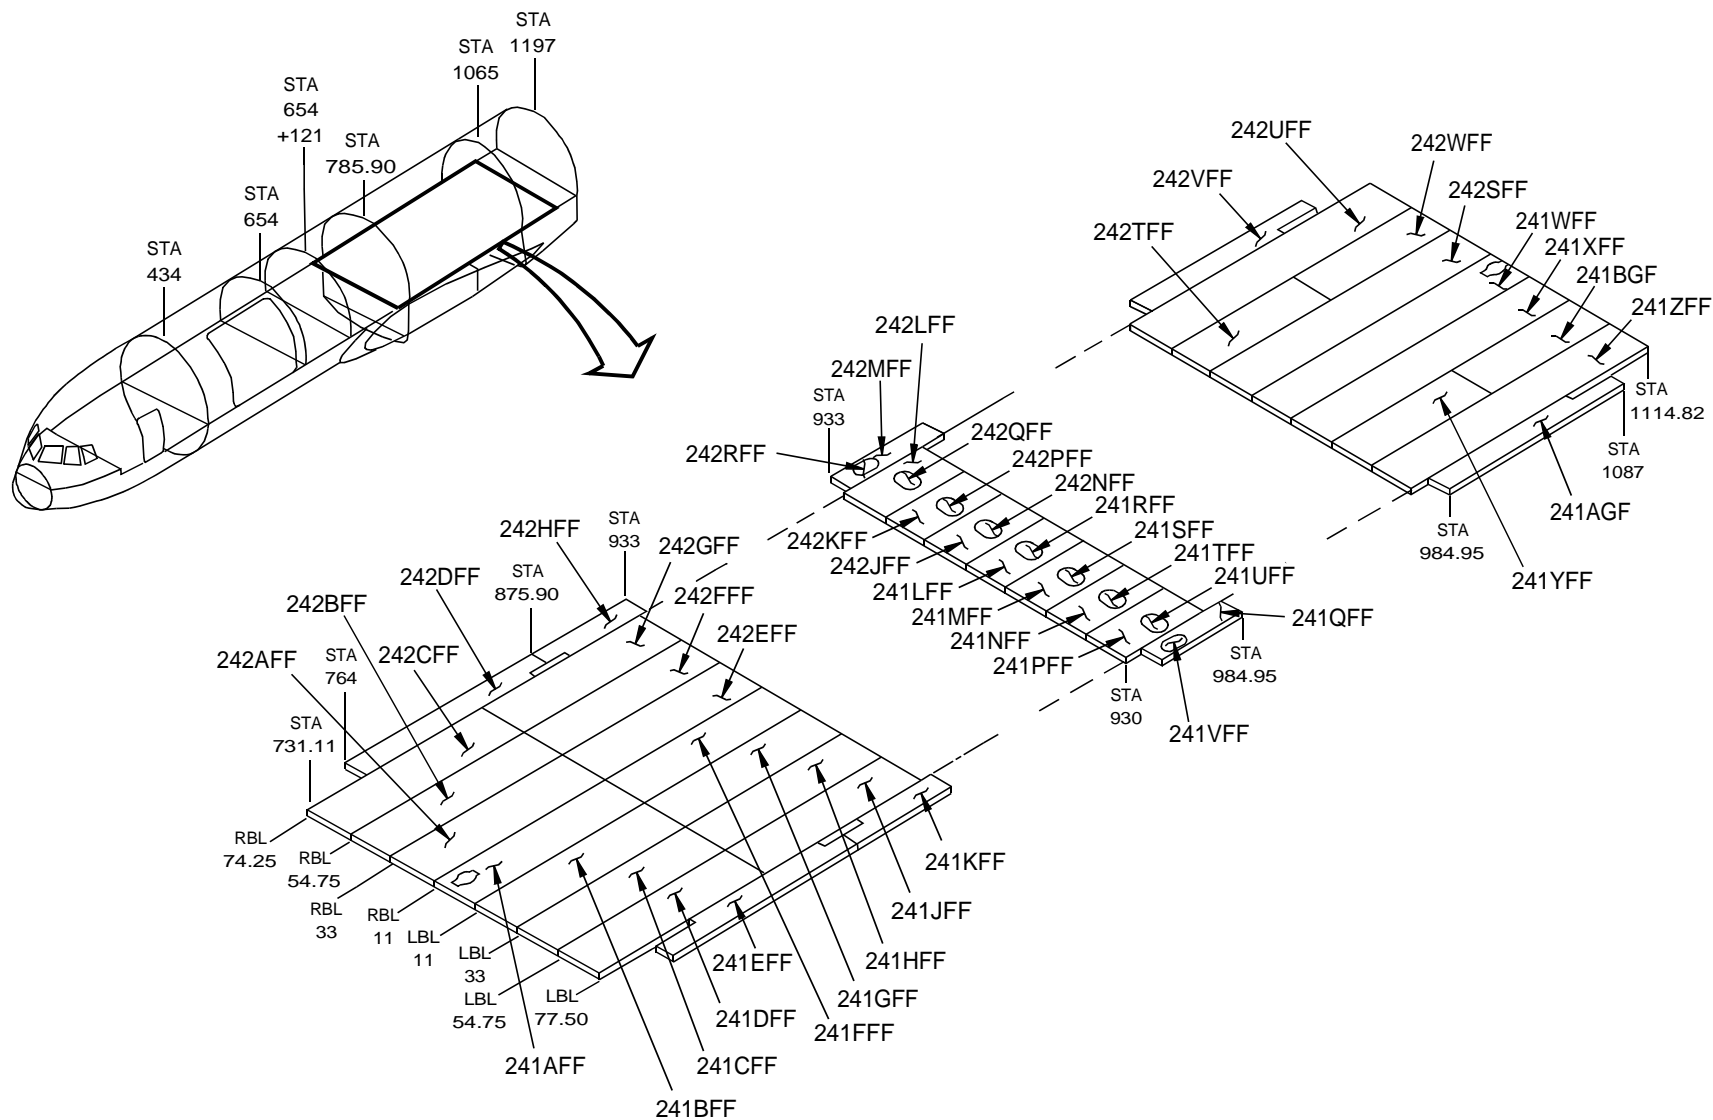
SUB-MAJOR ZONE 241/242 MAIN DECK FLOOR PANELS - FREIGHTER
